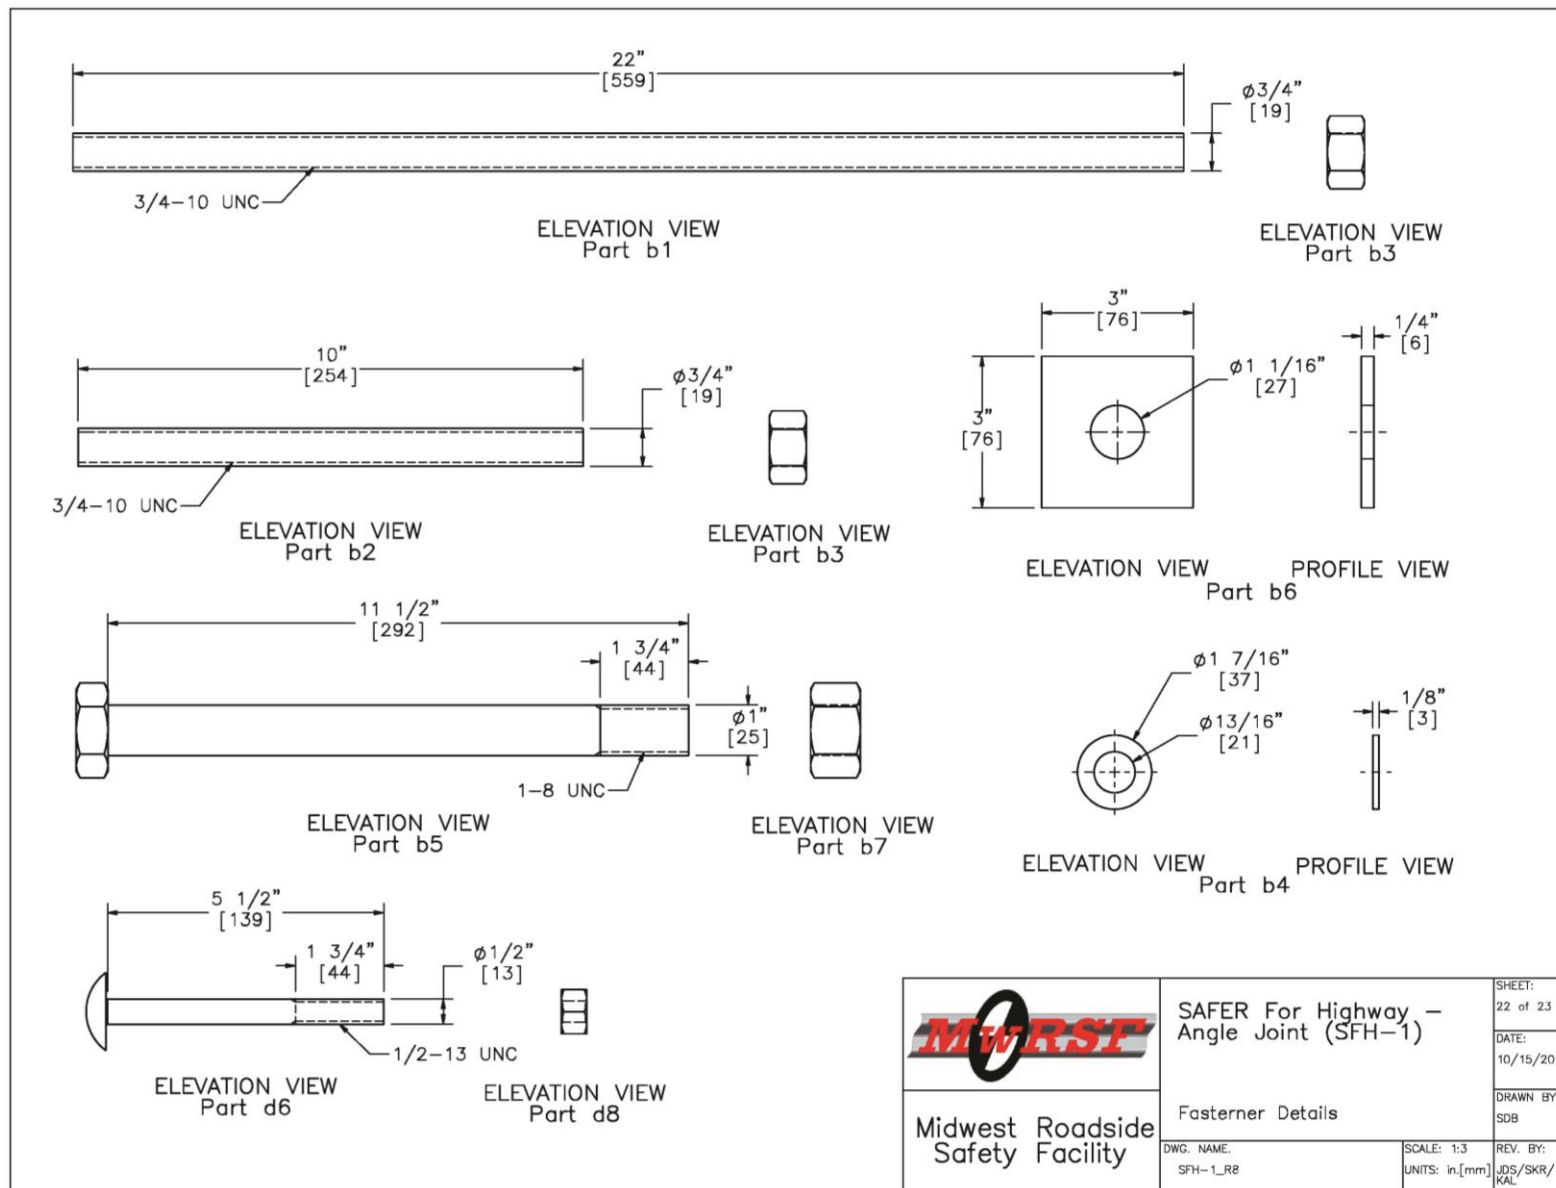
Recommended Barrier Design for Full-Scale Crash Testing, Fastener Details
